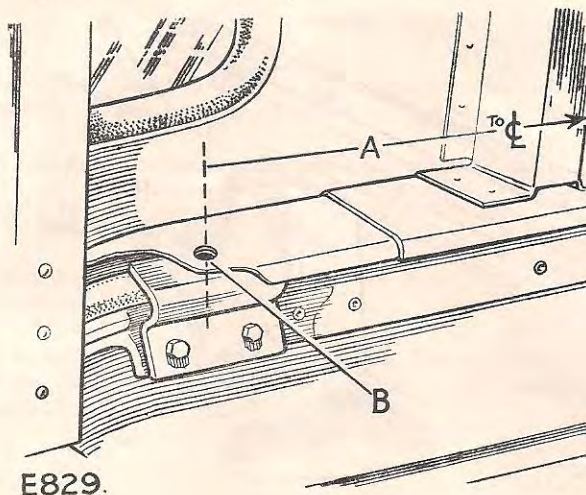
Cab mounting assembly in position. R.H. illustrated.
